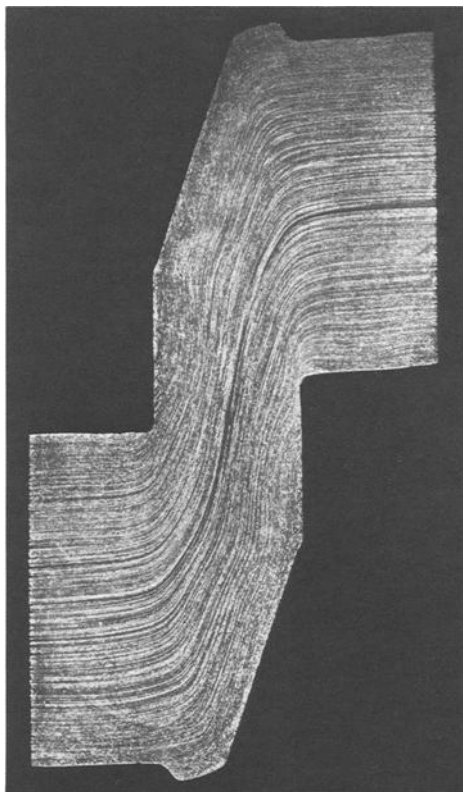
Grain flow of the crank web of the model forging with 50-mm journal diameter.
